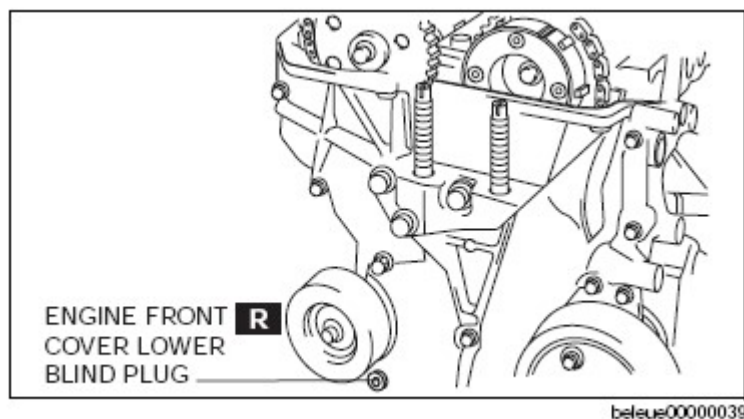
Identifying Engine Front Cover Lower Blind Plug
